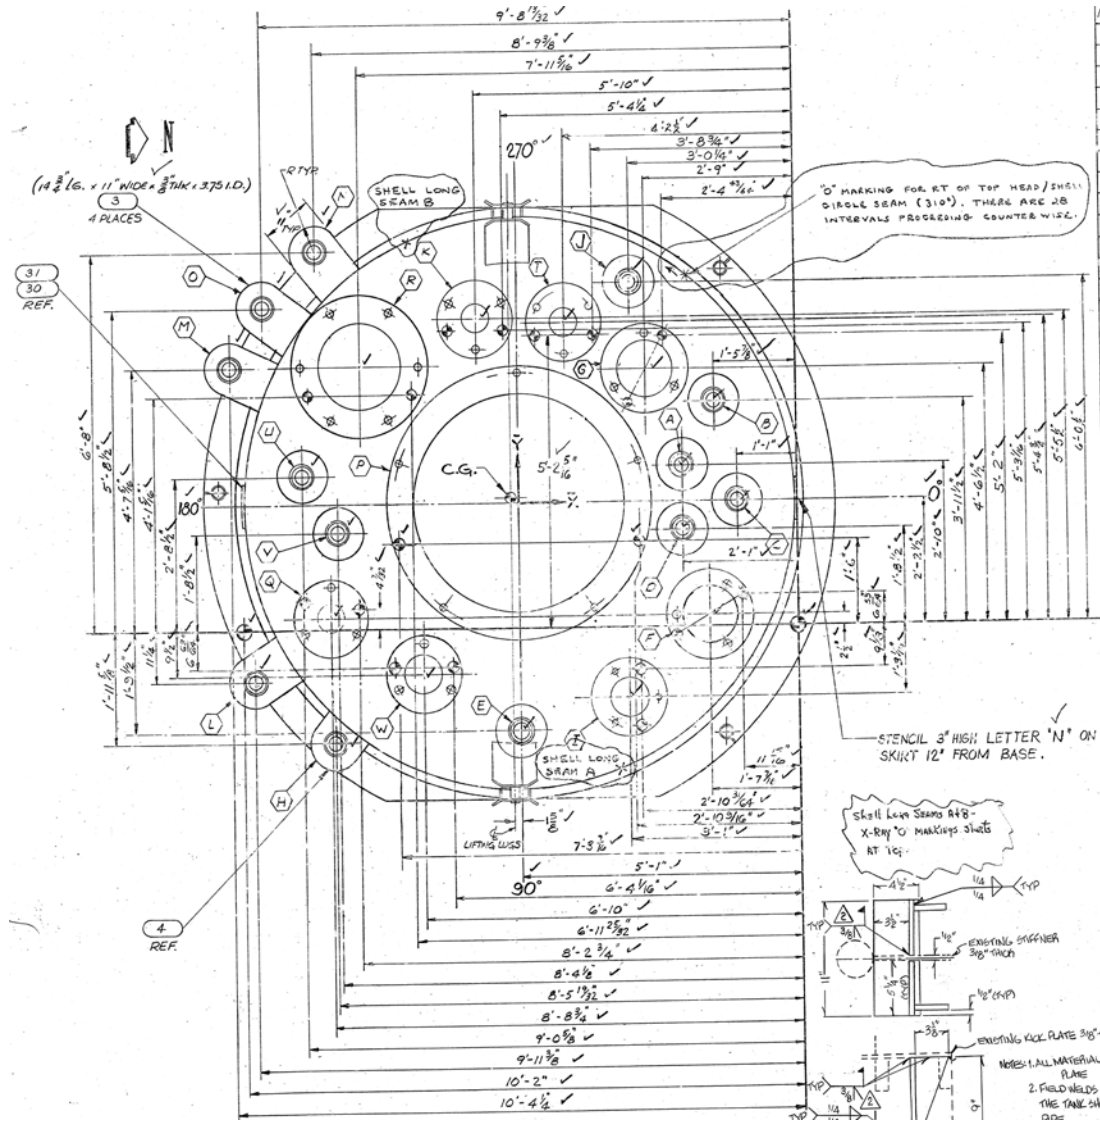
CFMT Plan View (From Drawing 58-5221-5-662, Rev. 2, Sheet 1 of 3)
